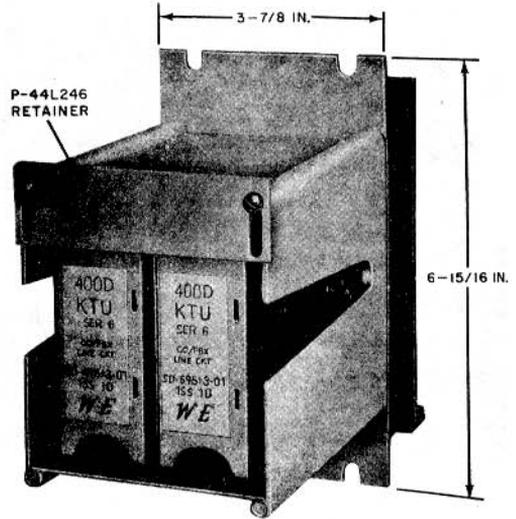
259-Type KTU For Mounting 18 or 20 Contact KTUs
